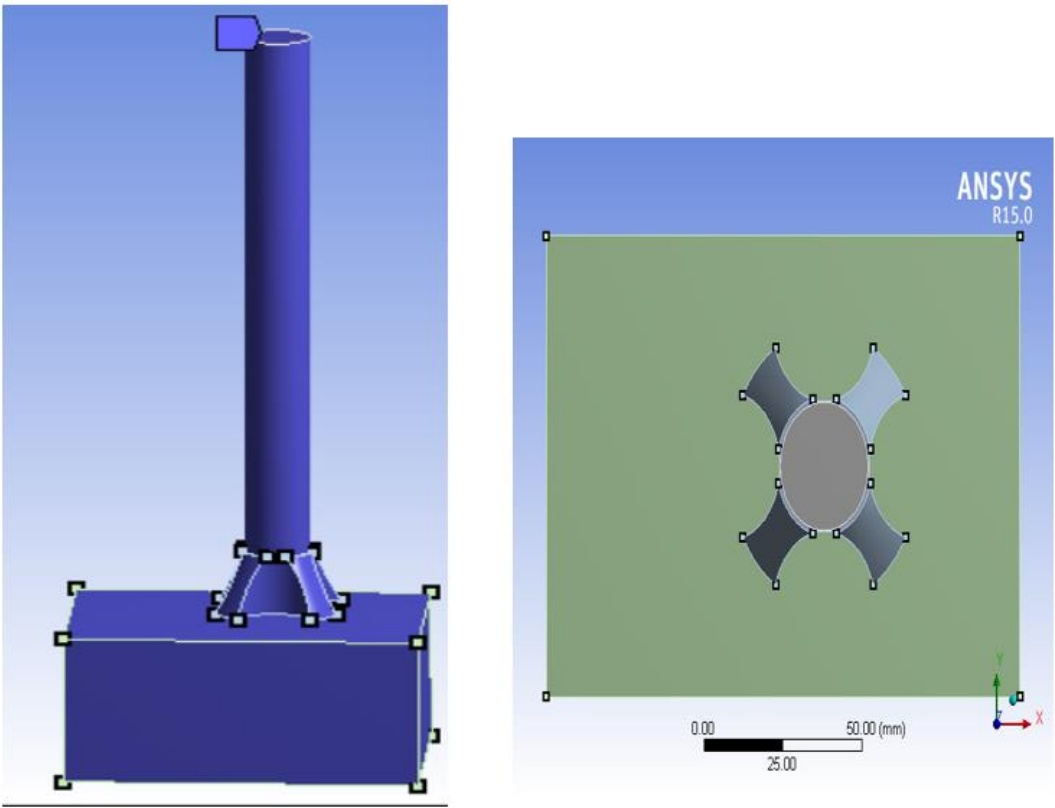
Geometry of drill pipe (a) Isometric (b) top view
